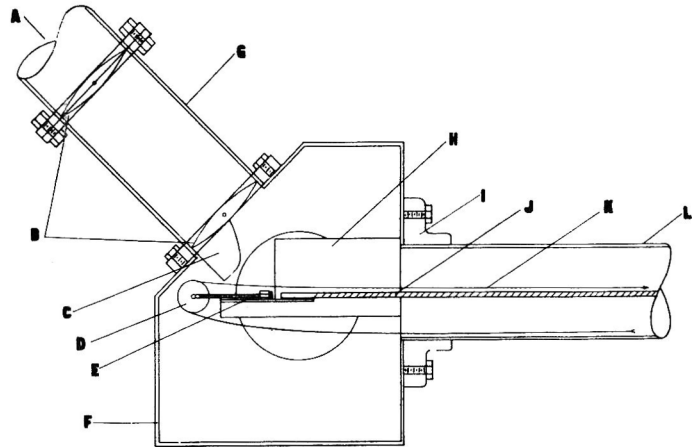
Cross-sectional sketch of valve assembly at feed end of system.
